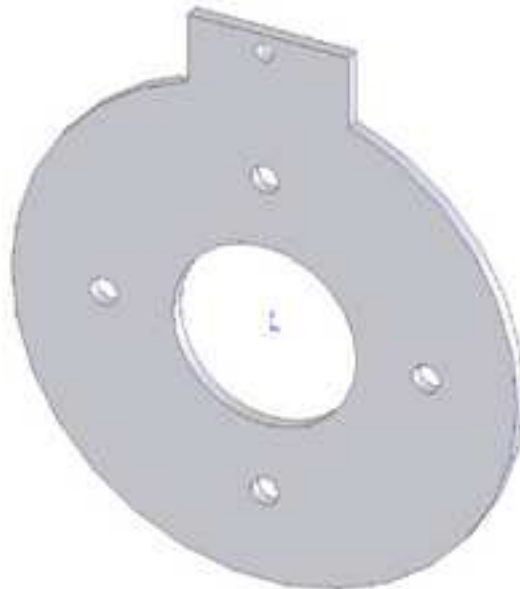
Conducting, probably aluminum-5052 composition, equipotential electrode ring with flange for the accelerator tube. Dimensions are shown on technical drawings given in appendix B with Part number 11
